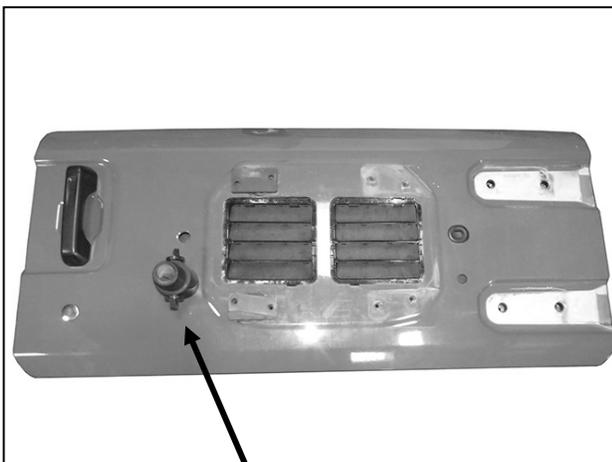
Remove plastic panel from passenger/right side of cargo area. Release door check rod (arrow) and remove bolts from hinges to remove rear door
